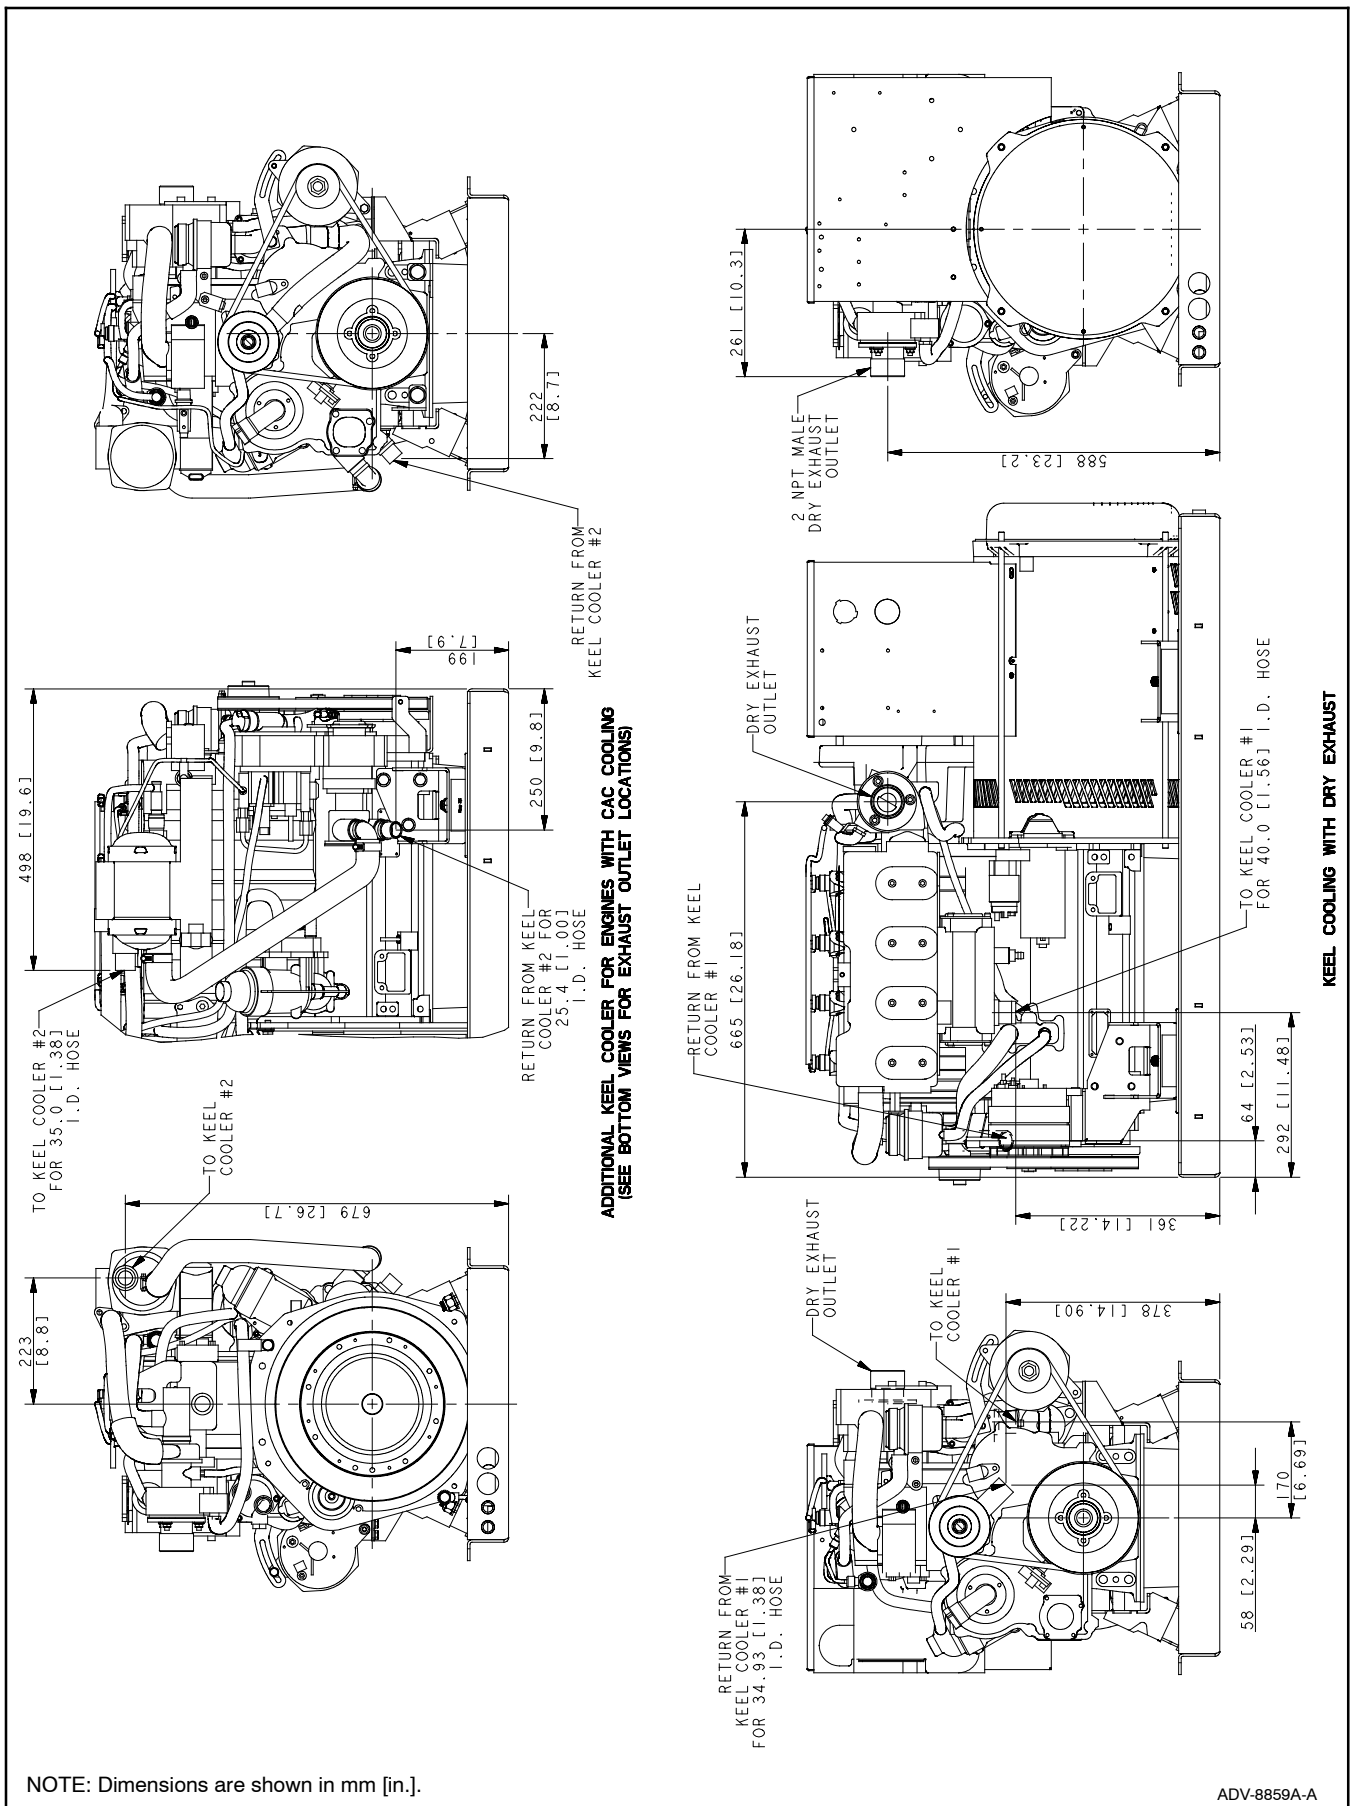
Accessory Drawing—Keel Cooling with Dry Exhaust, 32/40EKOZD and 28/35EFKOZD (Sheet 1 of 2)
